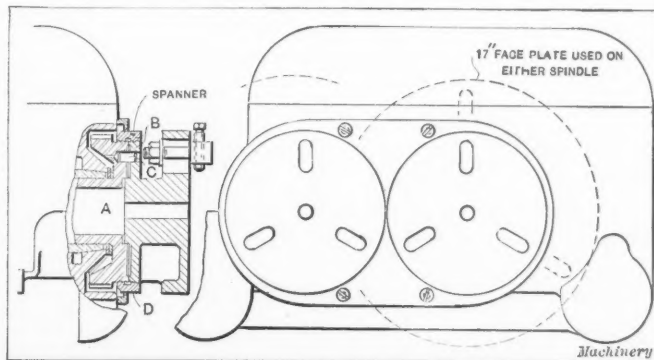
Method of Supporting Chucks on Double-spindle Machine
